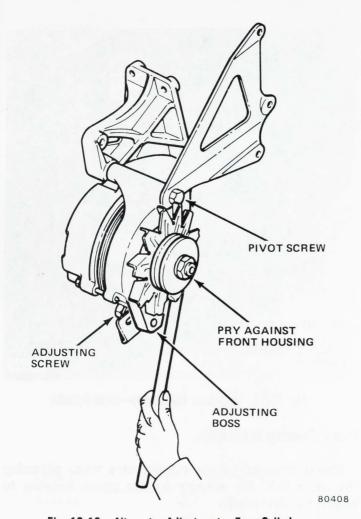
C-13 Alternator Adjustment—Four-Cylinder
